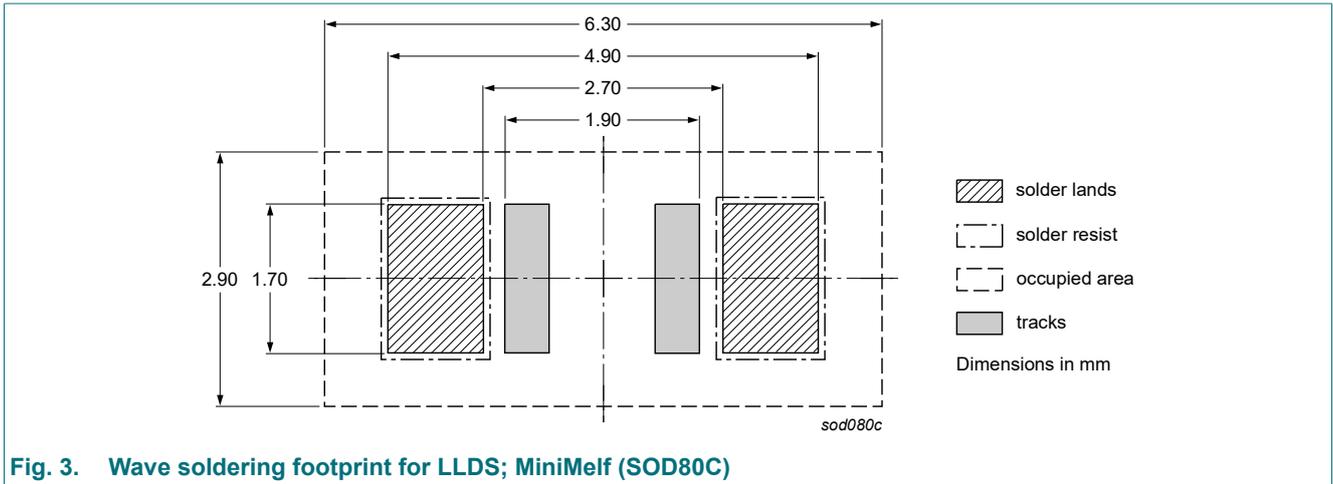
Wave soldering footprint for LLDS; MiniMelf (SOD80C)
